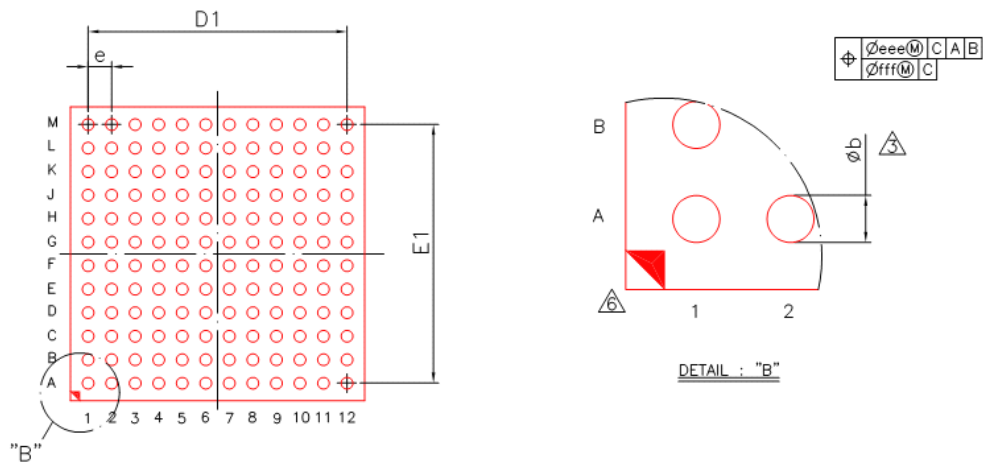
RK616 TFBGA(HF) Package Bottom View
